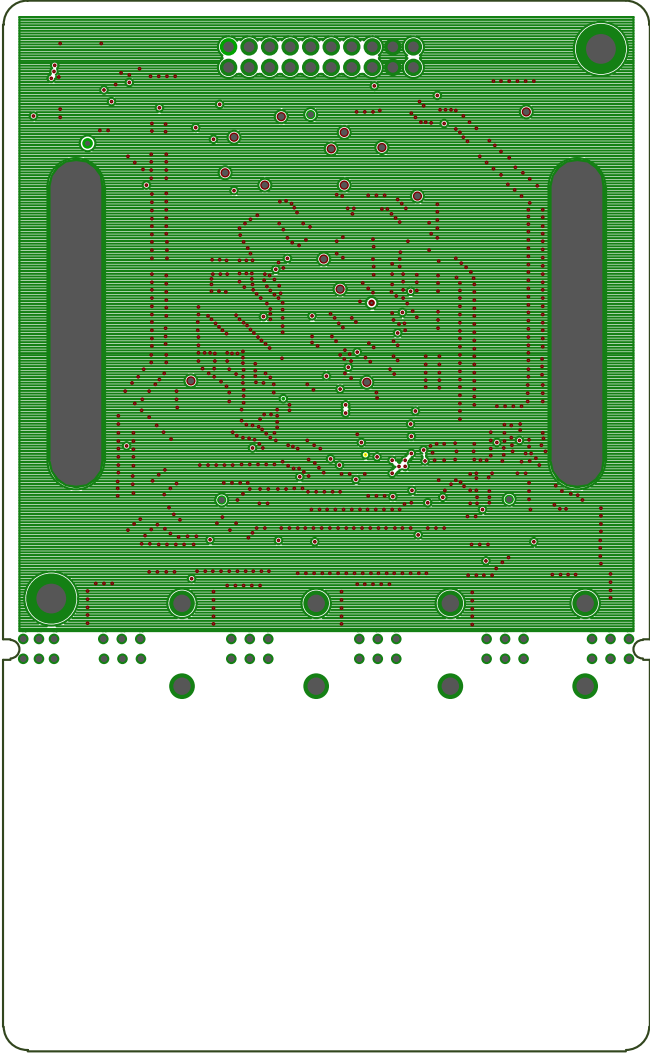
EVAL-ADPD7000Z PCB Layout: GND 2
